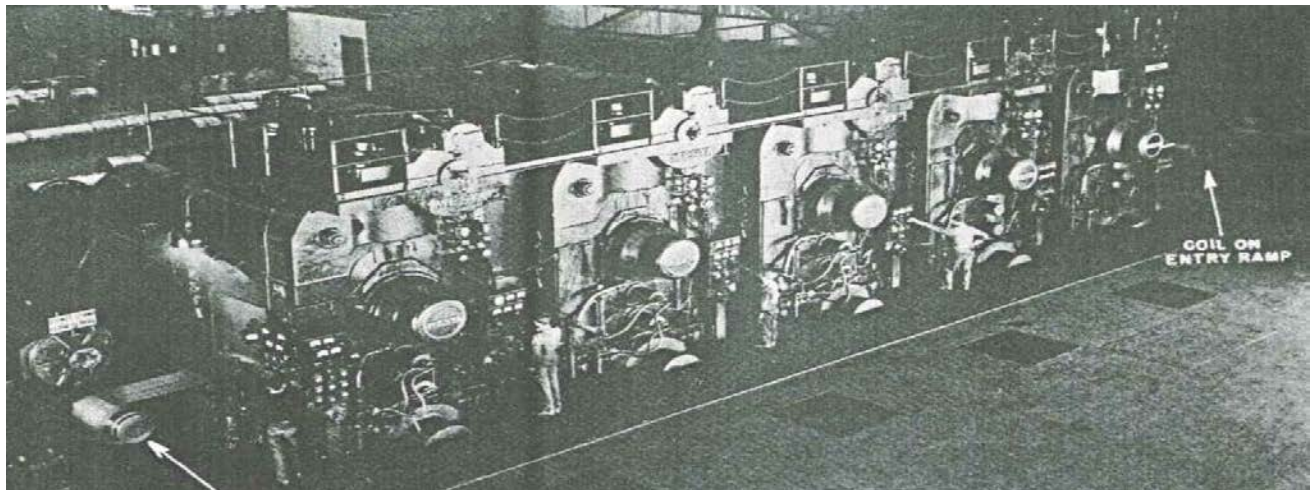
Typical Sheet mill of the 1860's[8]
